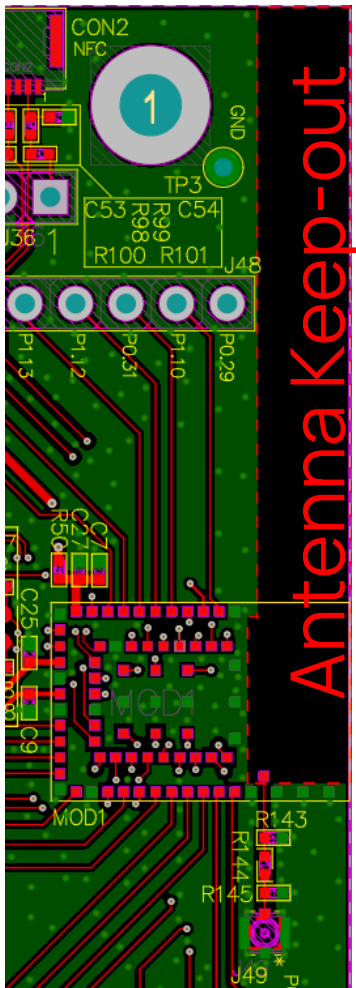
PCB trace Antenna keep-out area (shown in red), corner of the BL5340 development board for the 453-00052 module.
